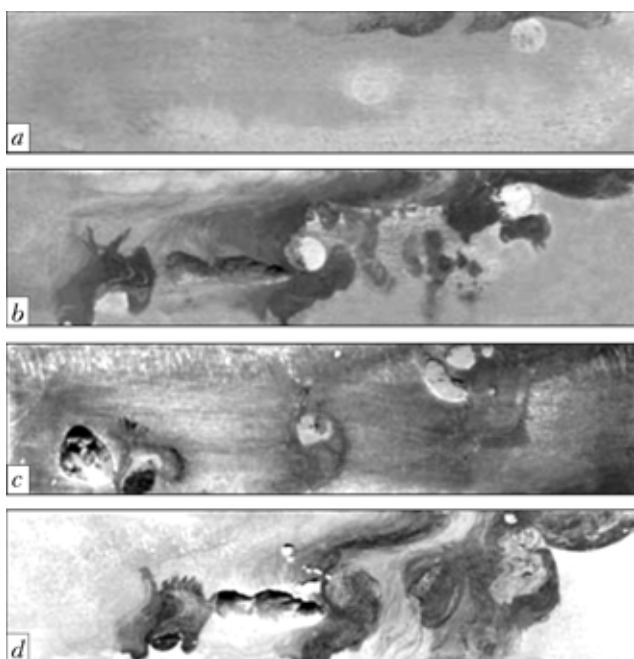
Patterns of copper rod melt moving in the different portions of longitudinal profile of the weld at the distance of 0.9 (*a*), 0.6 (*b*), 0.3 (*c*) mm from the weld axis and along the weld axis (*d*)
